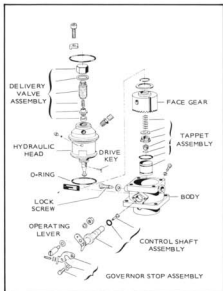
PSU PUMP (EXPLODED VIEW)
